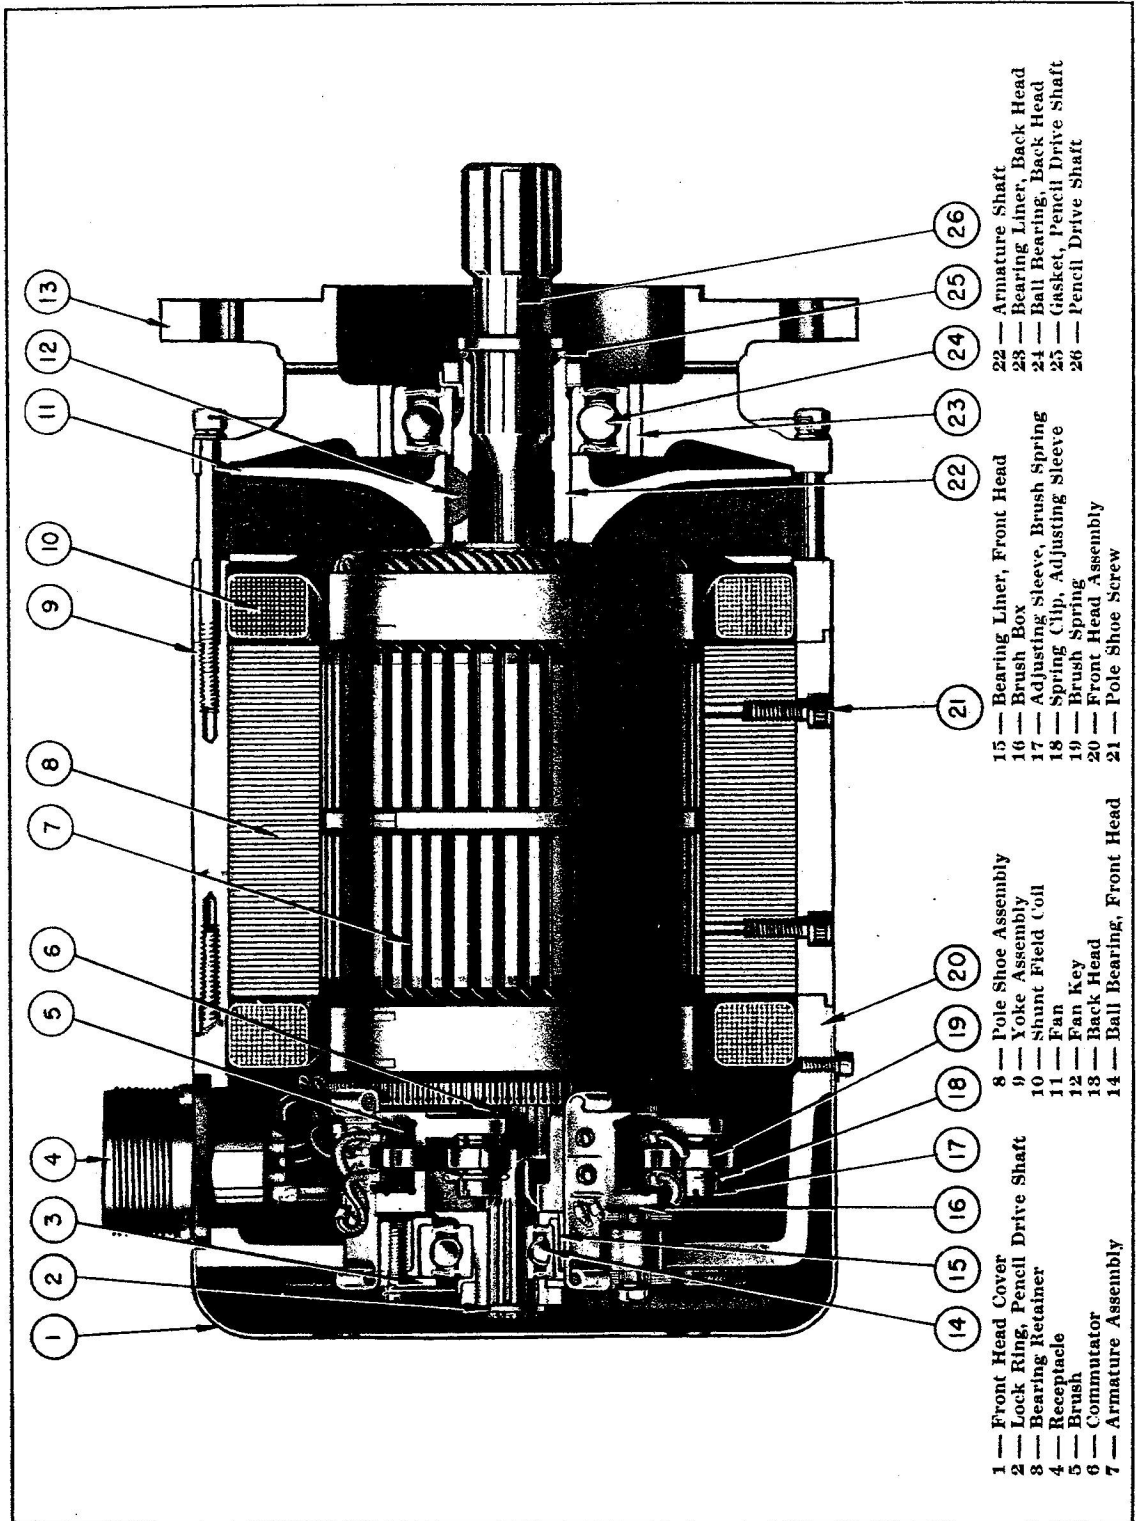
Sectional View Drawing - AAF Type M-3 Generator
